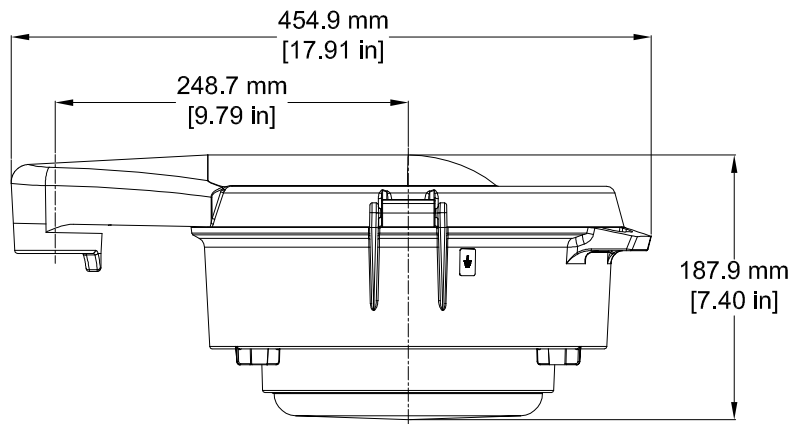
LUMINAIRE WITH 90° STANCHION HOOD
